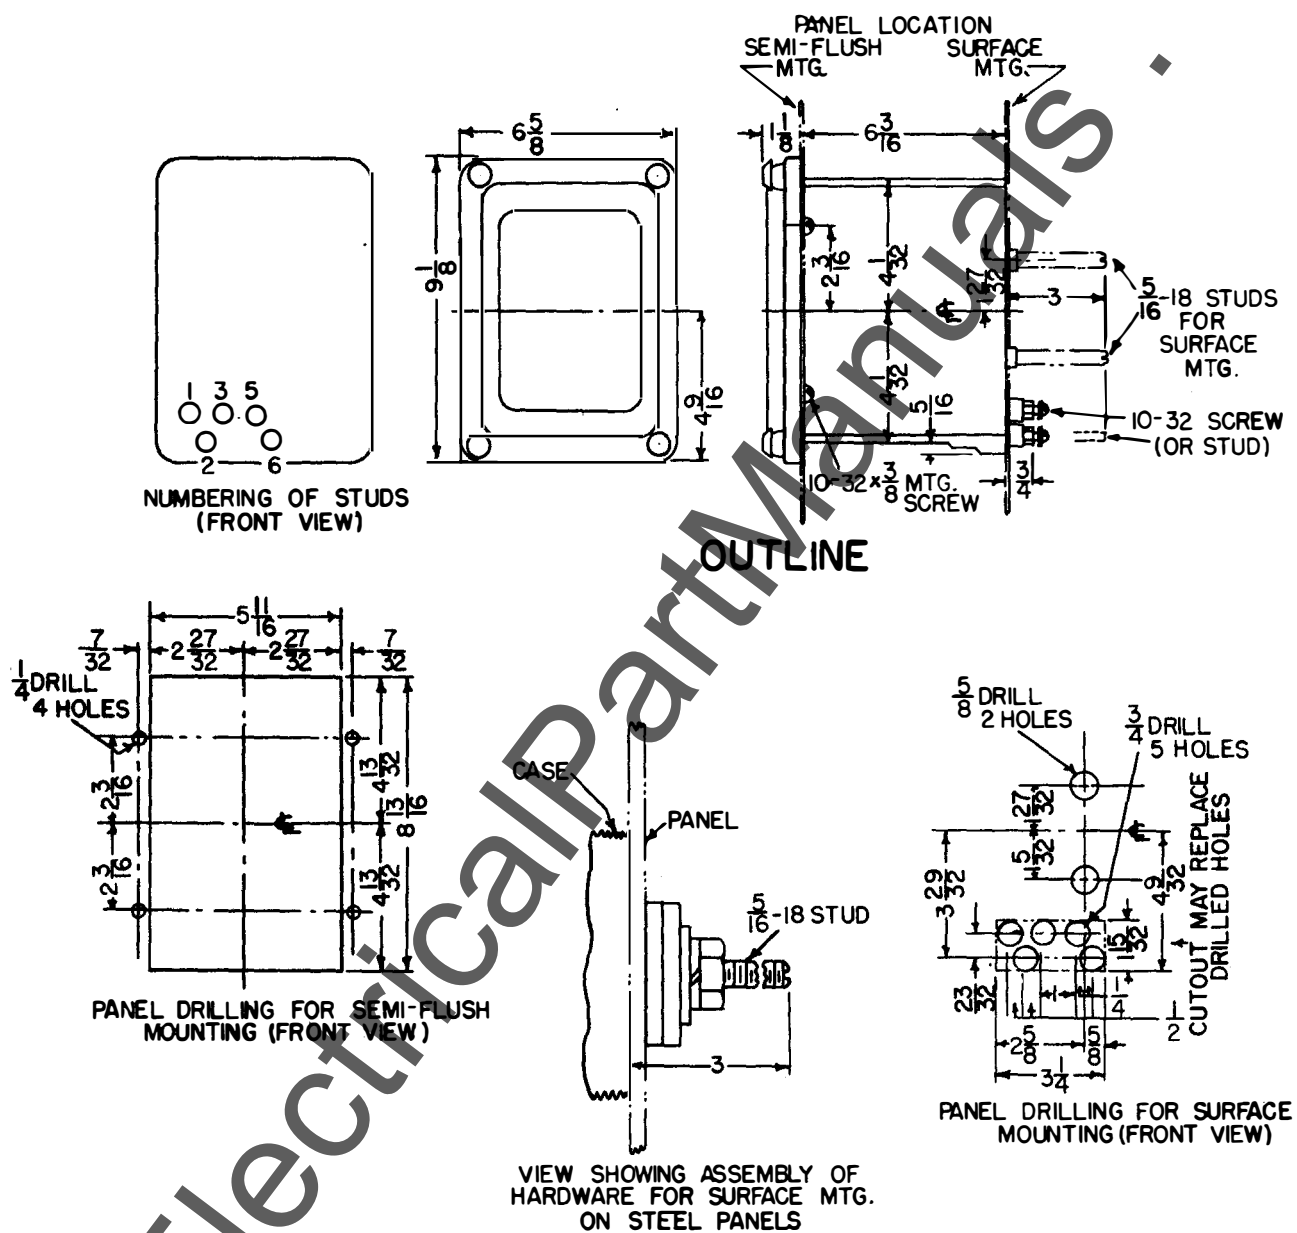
Outline And Panel Drilling Dimensions For The Type IJC51C Relay
